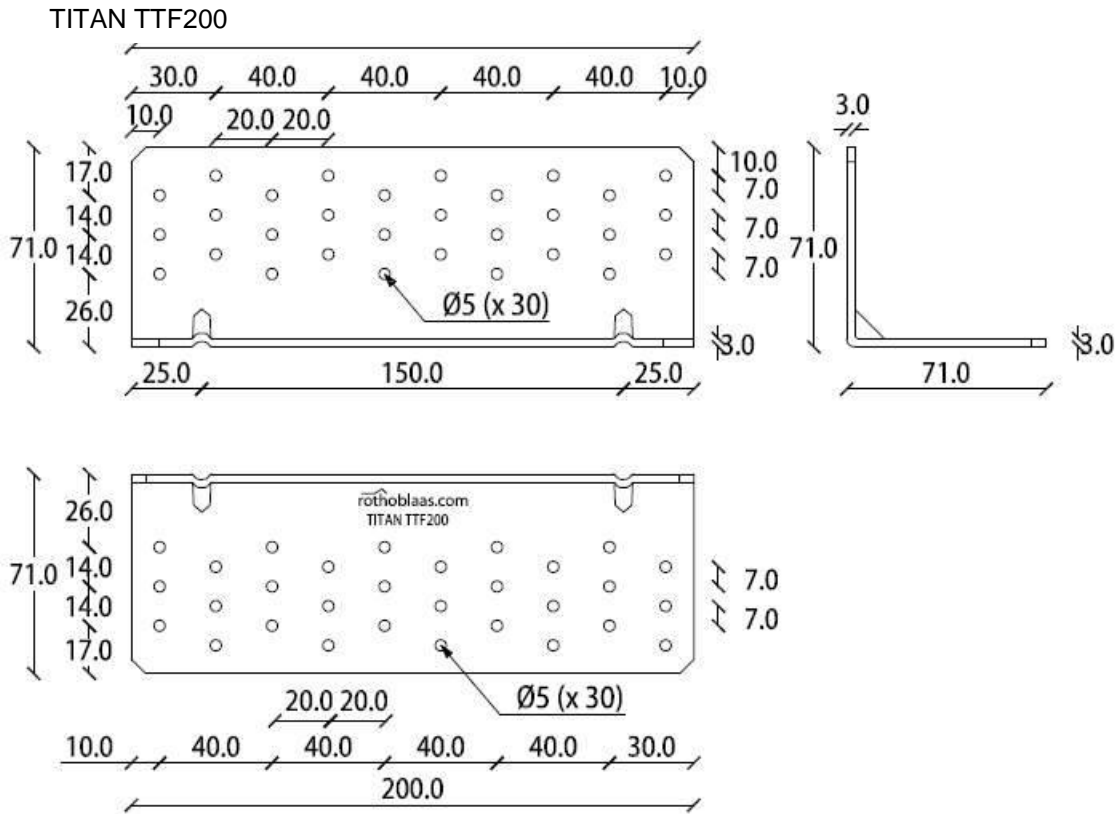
Dimensions of Angle Bracket TITAN TTF200
